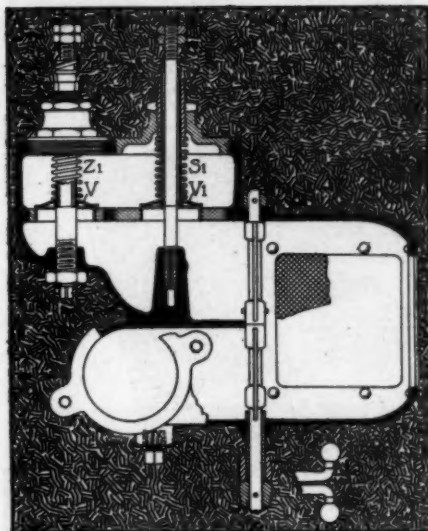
Sectional view of air intake, indicating screen to keep out dirt
